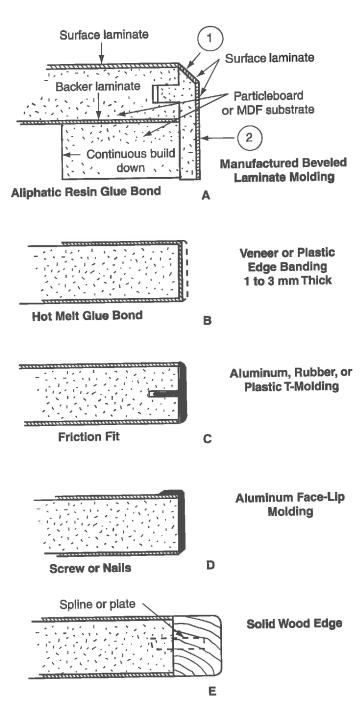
Surface laminates are bonded before applying manufactured beveled laminate molding, veneer or plastic edgebanding, T-moldings, as well as metal or solid wood edge. (*Chuck Davis Cabinets*)
